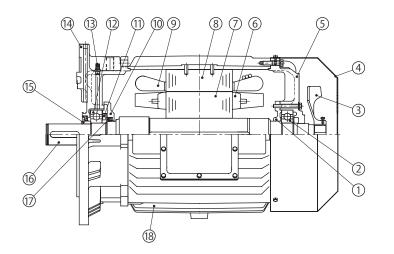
Direct-coupled motor for CYCLO Drive (Open bearing structure) (Example: N-200LS 30kW 6P)
